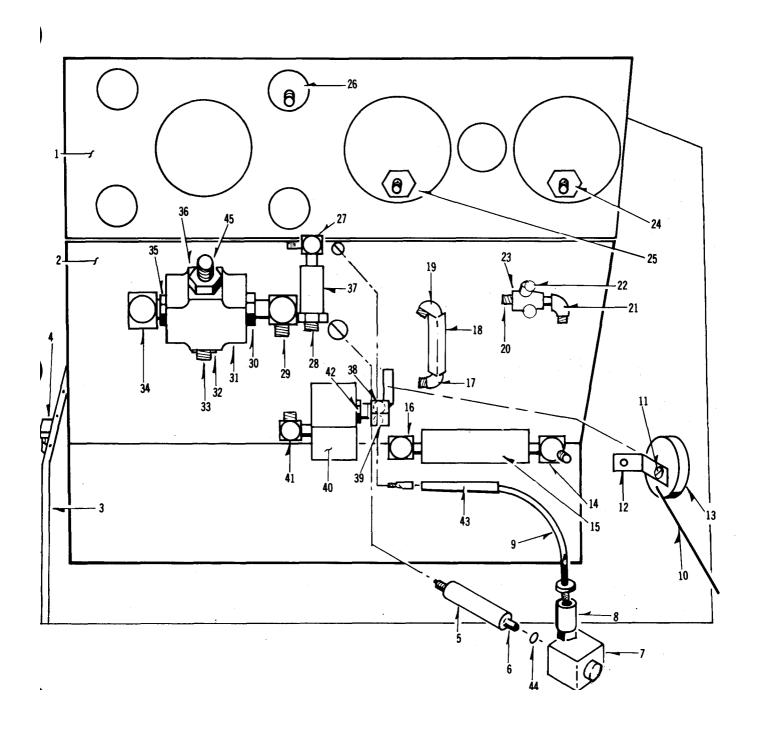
Control Panel and Instrument Assembly (Back View)
